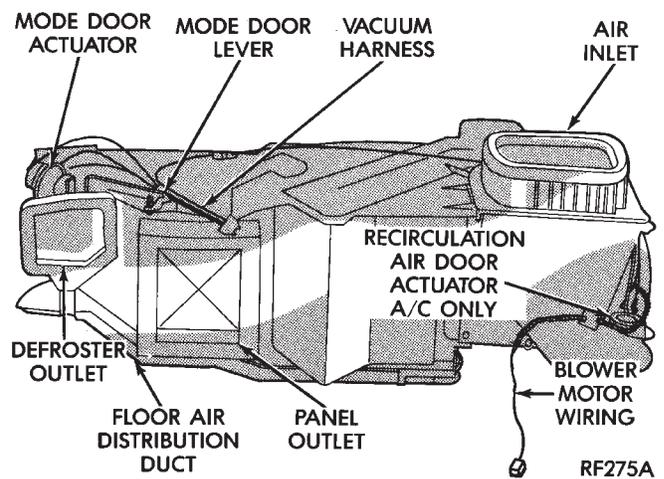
Position Heater-A/C Unit for Disassembly and Reassembly
